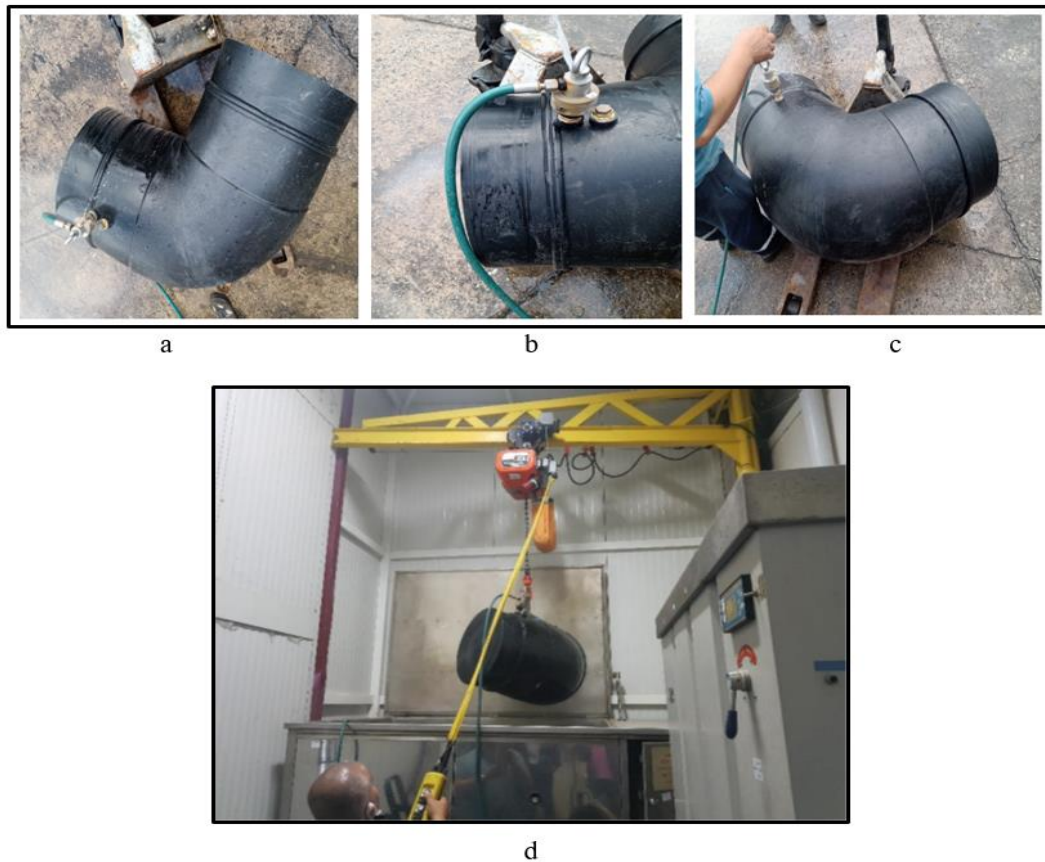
The hydrostatic pressure test preparation of 250 HDPE end cap welded with 250-90° elbow with induced hoop (circumferential) stress of 5.4 MPa for 165 hours at 8080°C
